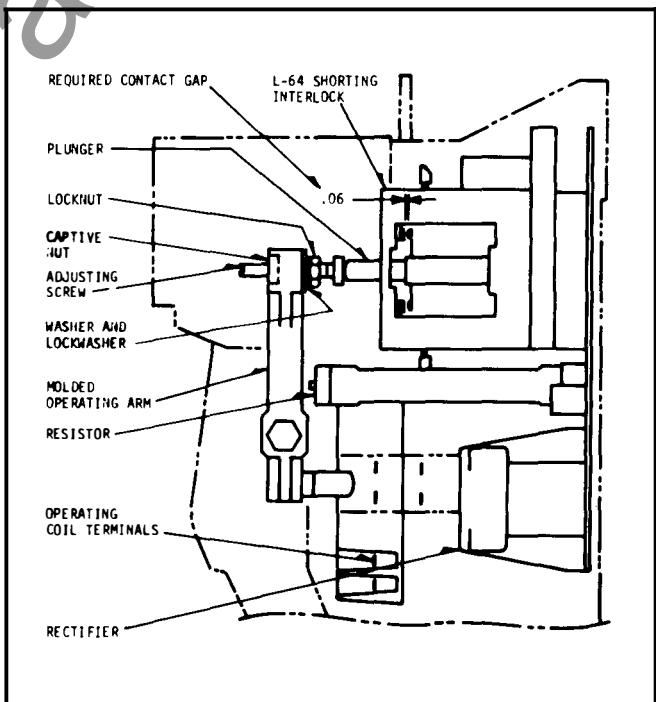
Adjustment of Type L-64 Shorting Interlock (From Dwg. 3512C85)
